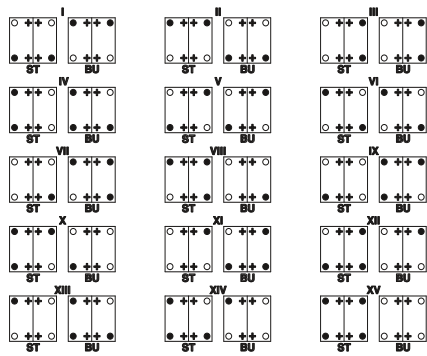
Coding with coding pins and sockets for housing with two contact inserts
